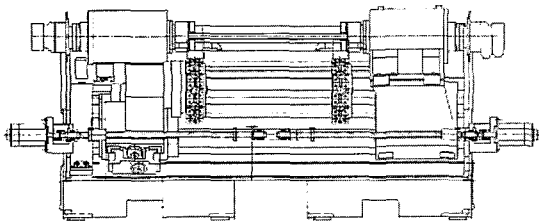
Laser multi-tasking machine drawing generated according to the design rules
